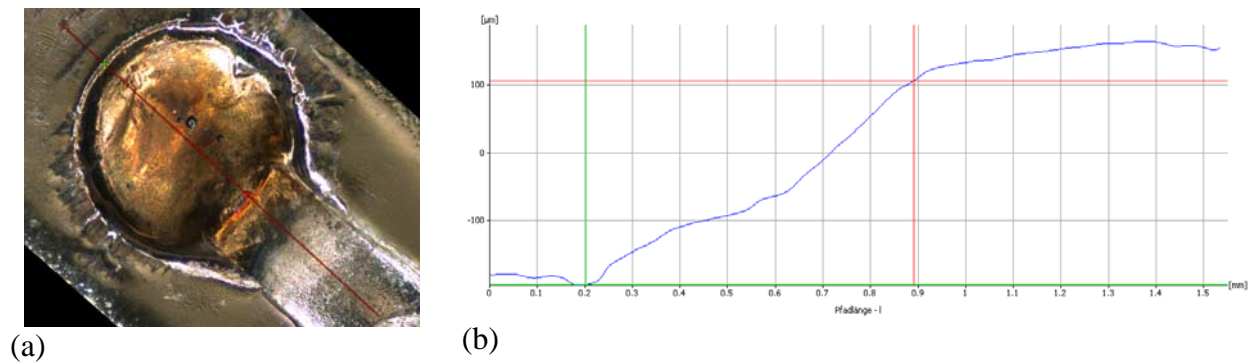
(a) Optical colour image with overlaid profile path. (b) Extracted surface profile with two measurement positions (green and red). The surface profile can be used to decide whether the welding spot is ok or not ok.
